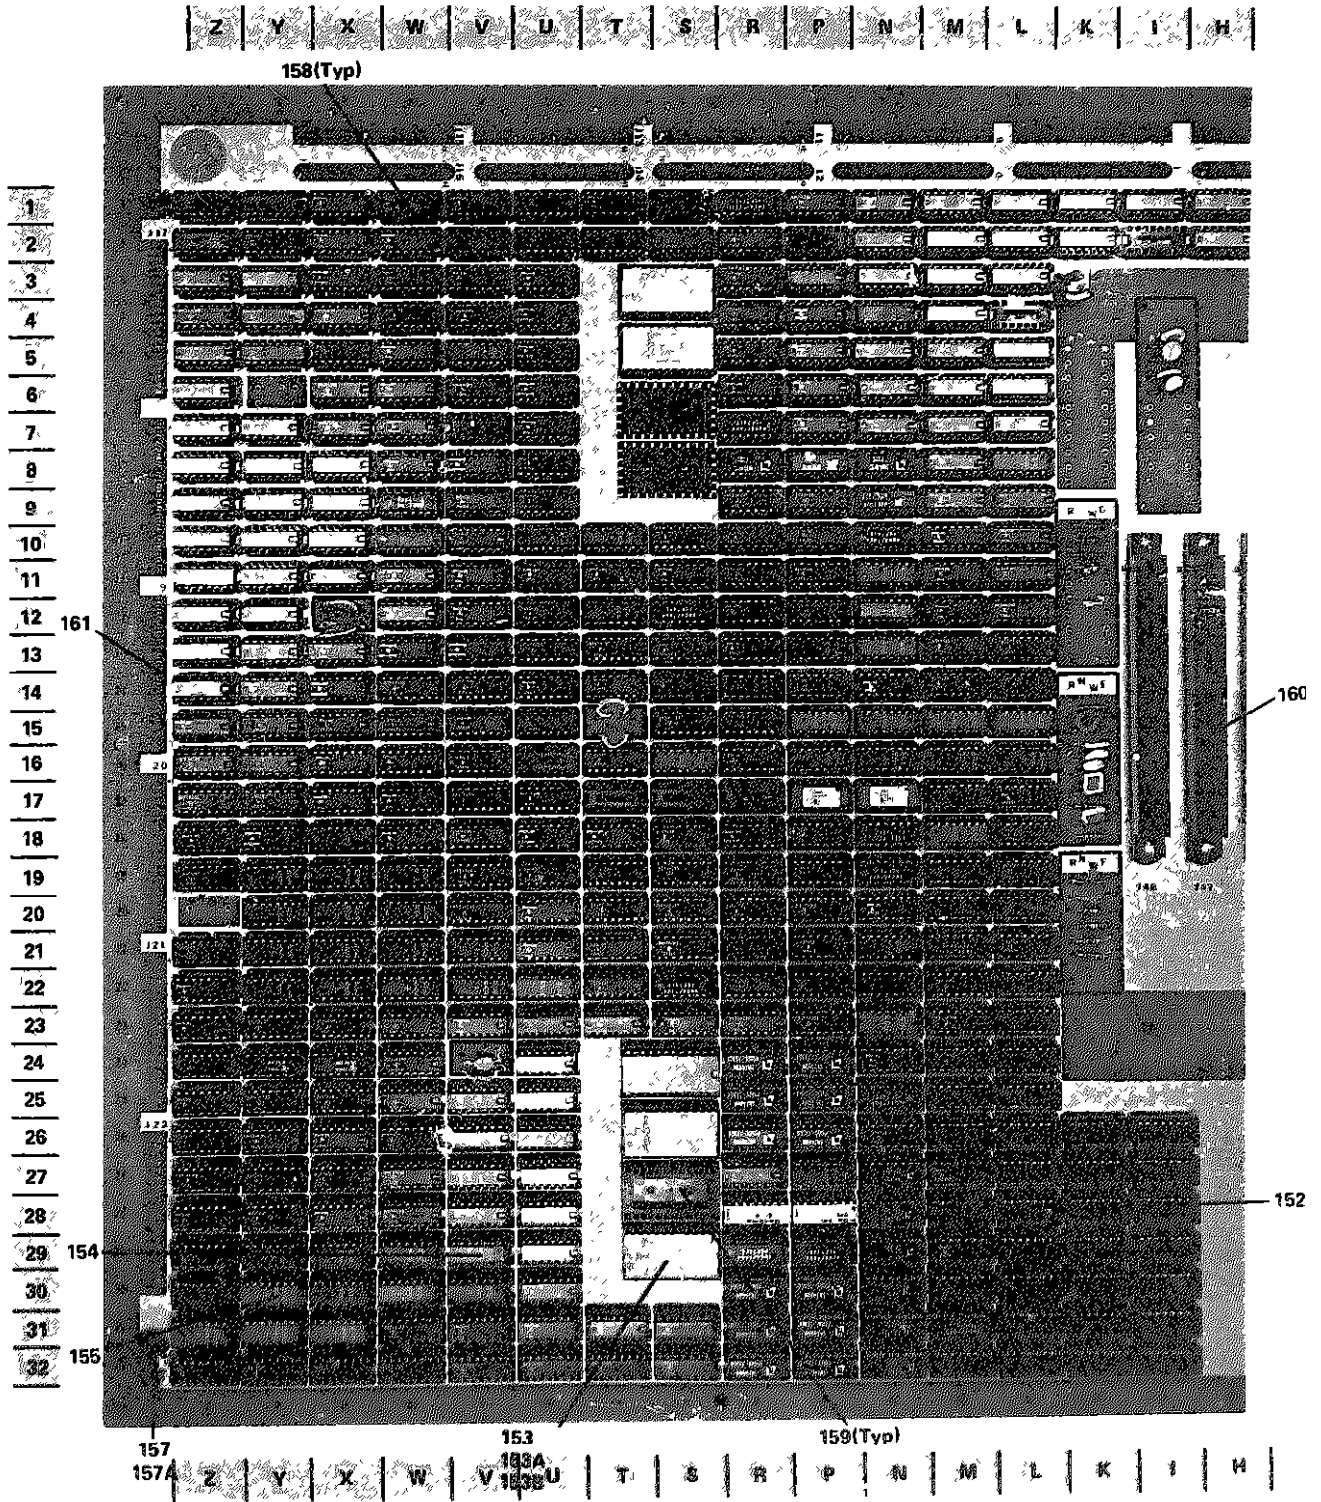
Min Wire Weib Board Assembly (A3)(Sh. 14-10)
